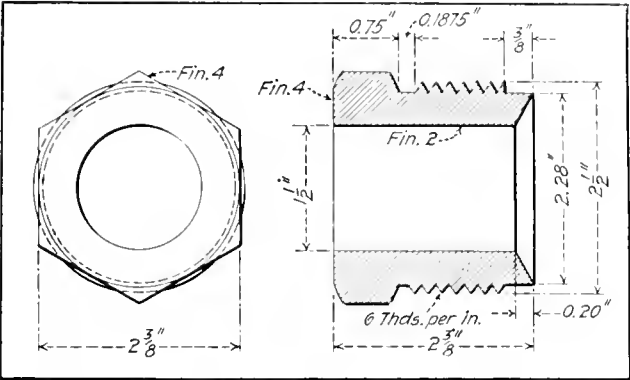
System of Indicating Finished Surfaces, applied to a Drawing.
